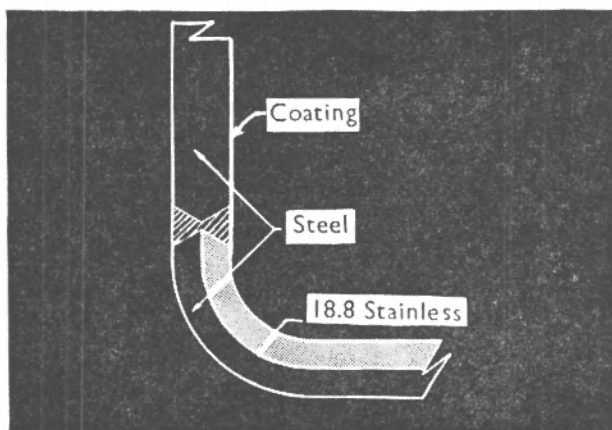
Detail of welded steel—stainless clad tank construction.
